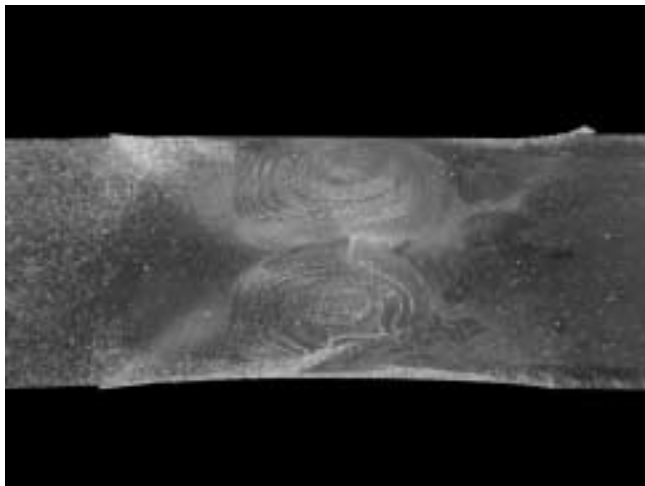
Double Sided Butt Weld Joint made in 12.7 mm 6061-T6
